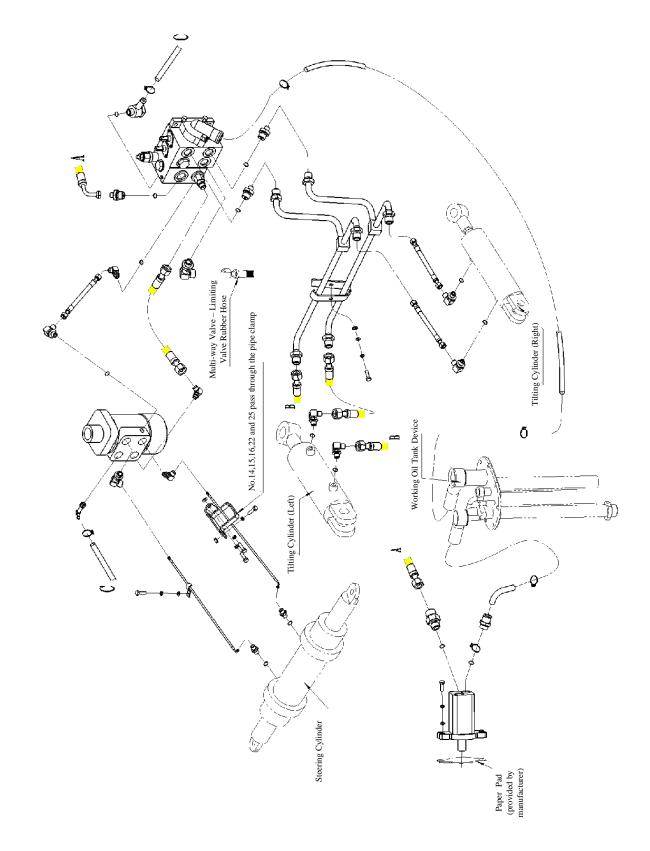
Schematic Drawing of Hydraulic Pipeline (Diesel Forklift Trucks)
